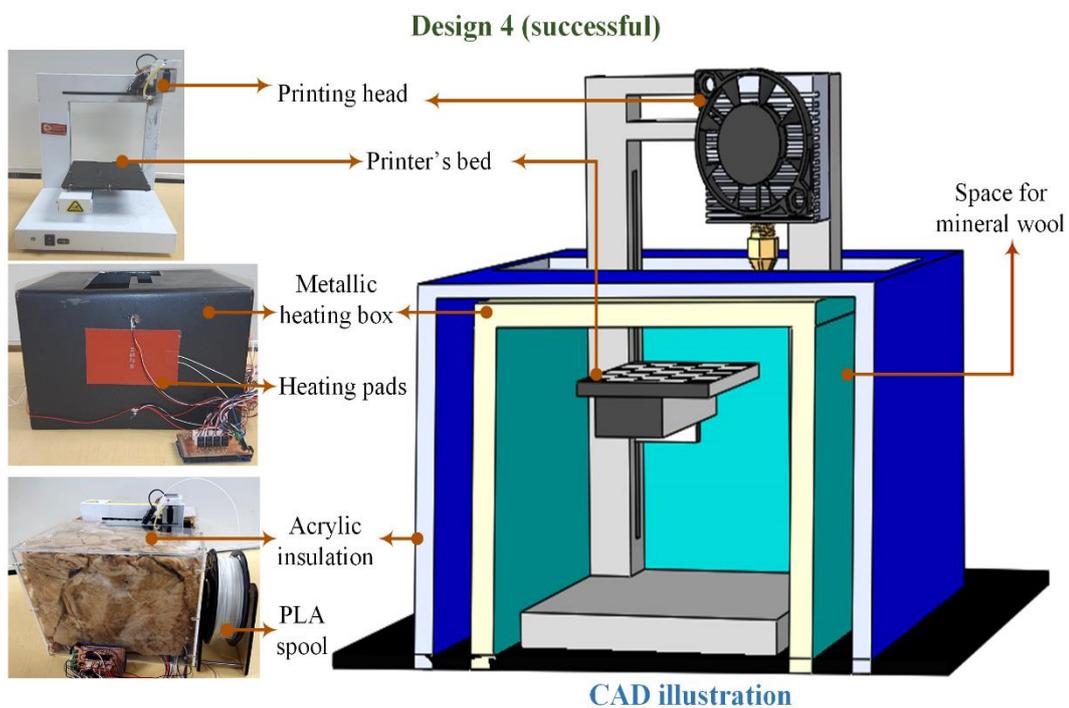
Layout of the successful heating box design (design 4) and the CAD illustration of the whole printing system.
